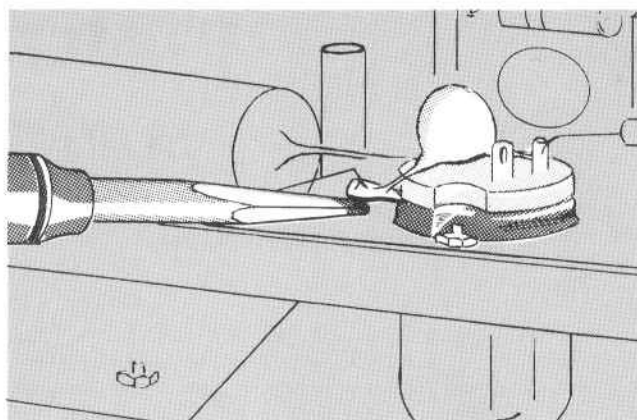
Soldering to a terminal. Note the slight fillet of solder—exaggerated for clarity—formed around the wire.
